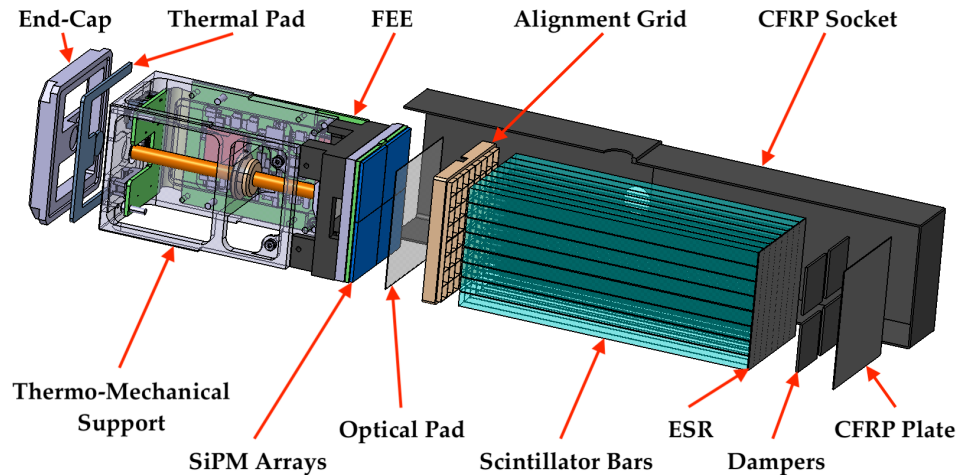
Exploded view of a POLAR-2 polarimeter module.
